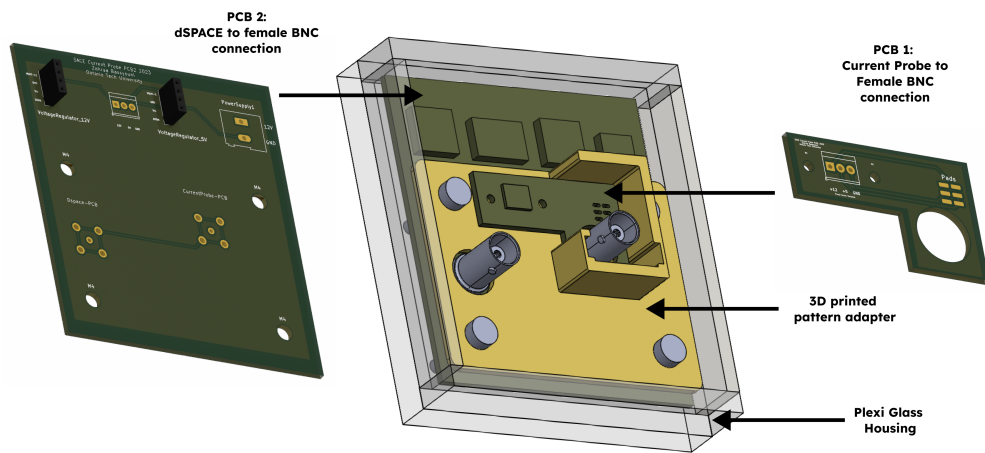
The designed current probe adapter using Solidworks for geometrical details and Kicad for electrical connections.
